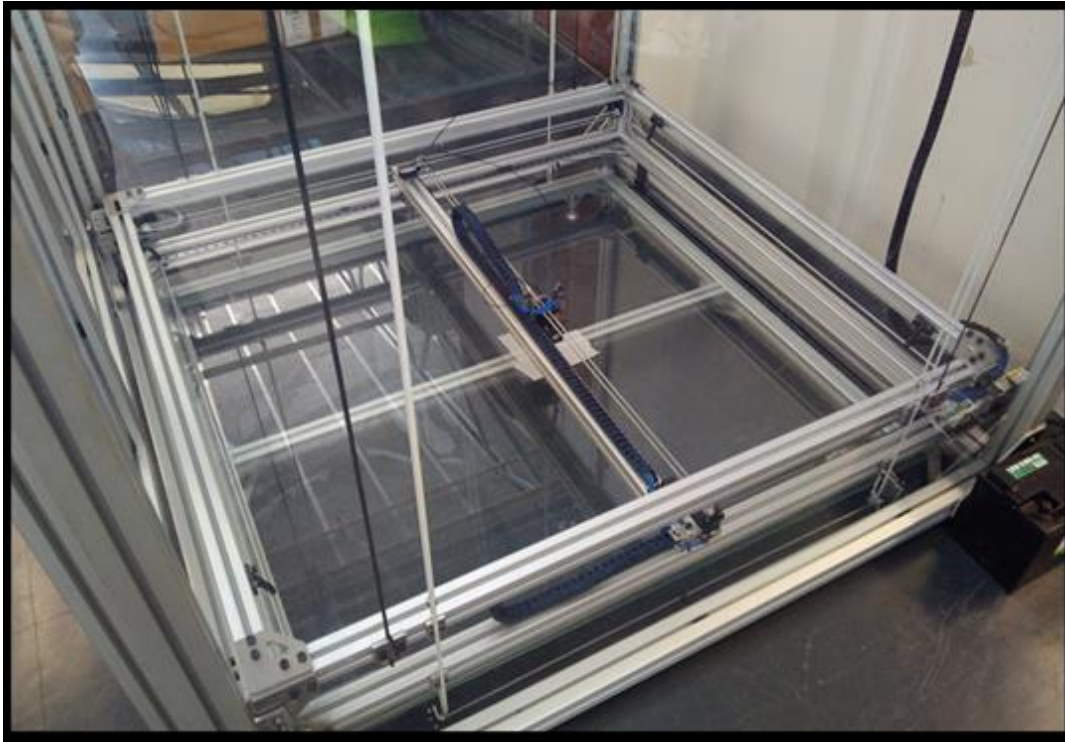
Printer X/Y/Z Axes – Gantry Subassembly View
